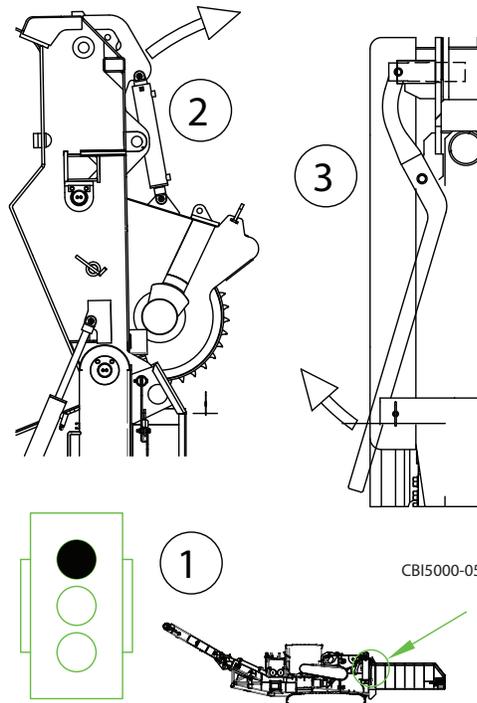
Install Locking Pin (6400/6800 Series)
